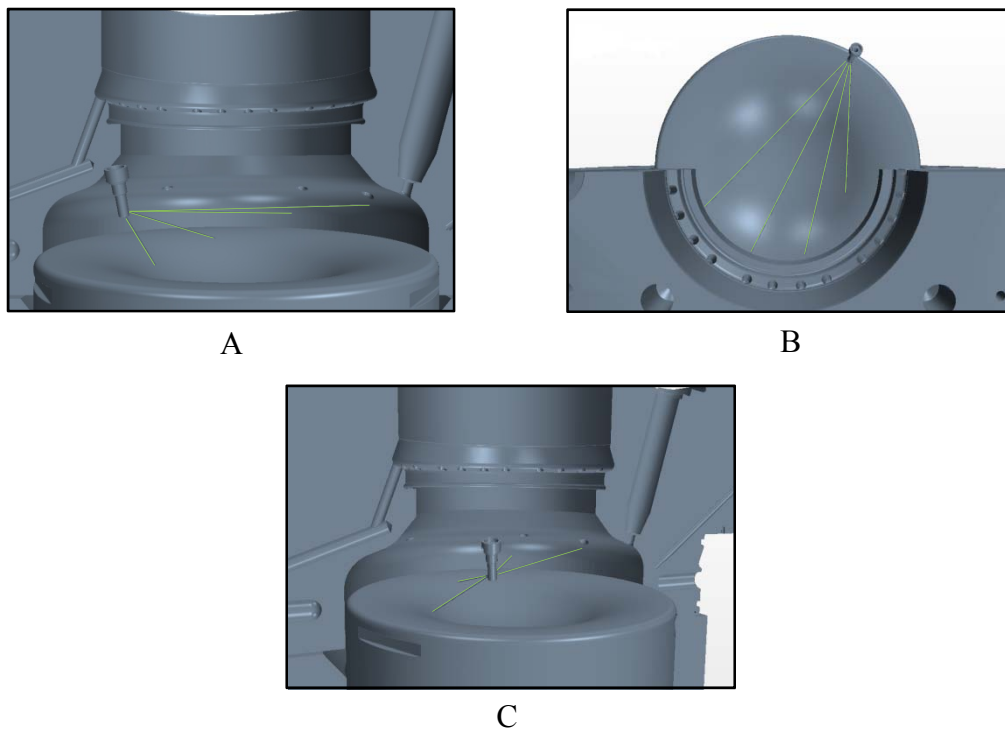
Combustion chamber with piston at TDC. One fuel injector is shown with fuel spray directions indicated. Different views: A – Side view, B – Top view and C – Slightly inclined and turned side view.
